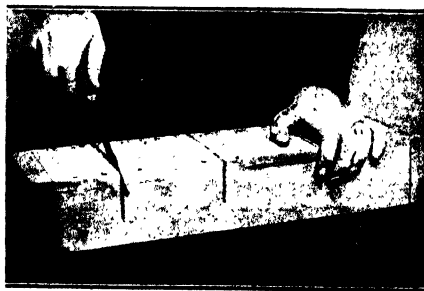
Box turned over for cutting. Use sharp thin knife wet with soap suds, and cut on drawing stroke only.
